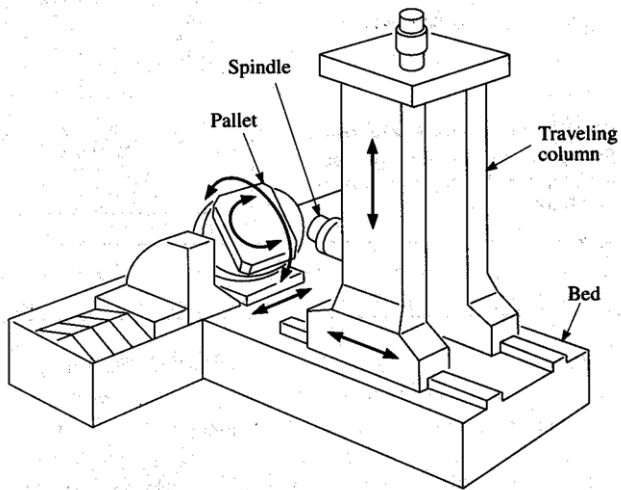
Schematic illustration of a five-axis profile milling machine. Note that there are three principal linear and two angular movements of machine components.
